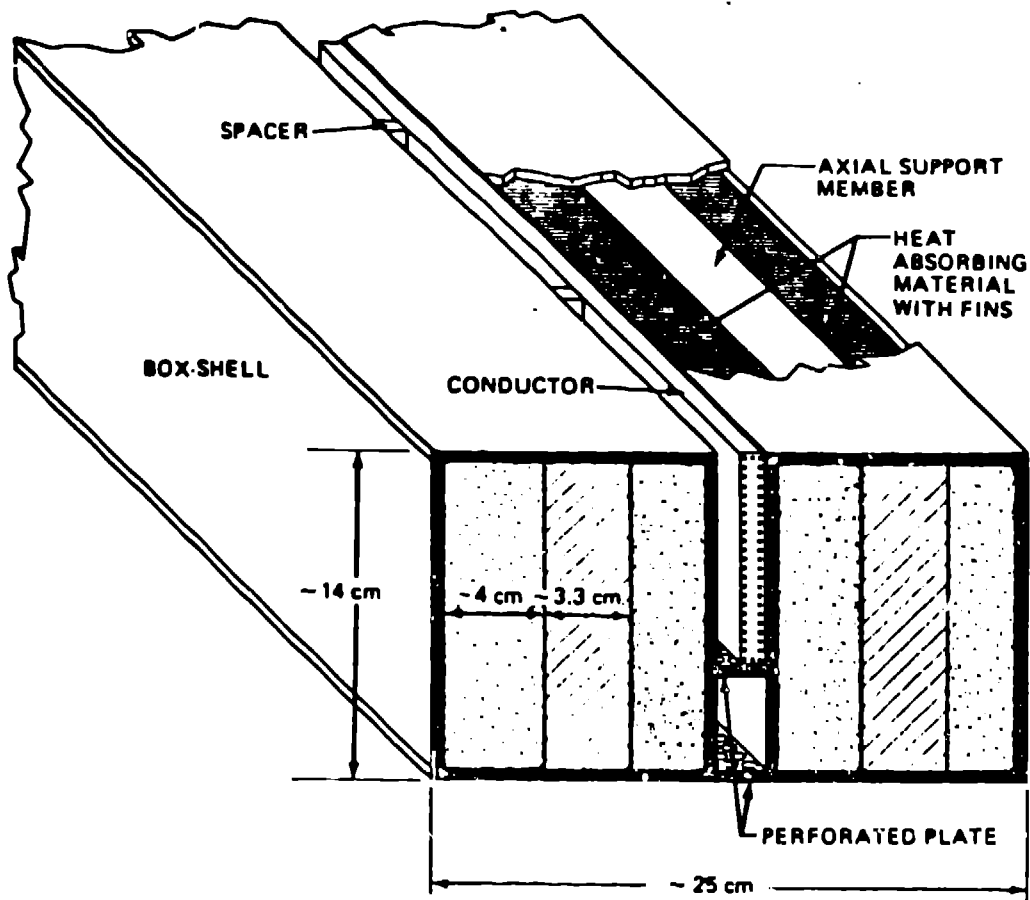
CONDUCTOR AND SUPPORT ASSEMBLY
